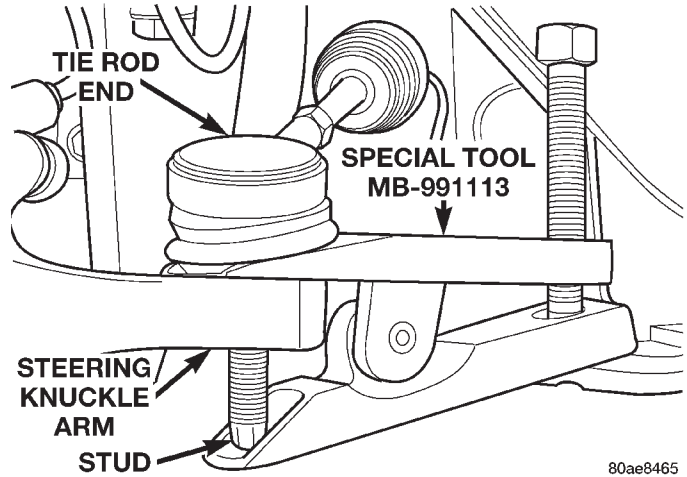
Tie Rod End Removal From Steering Knuckle Arm
